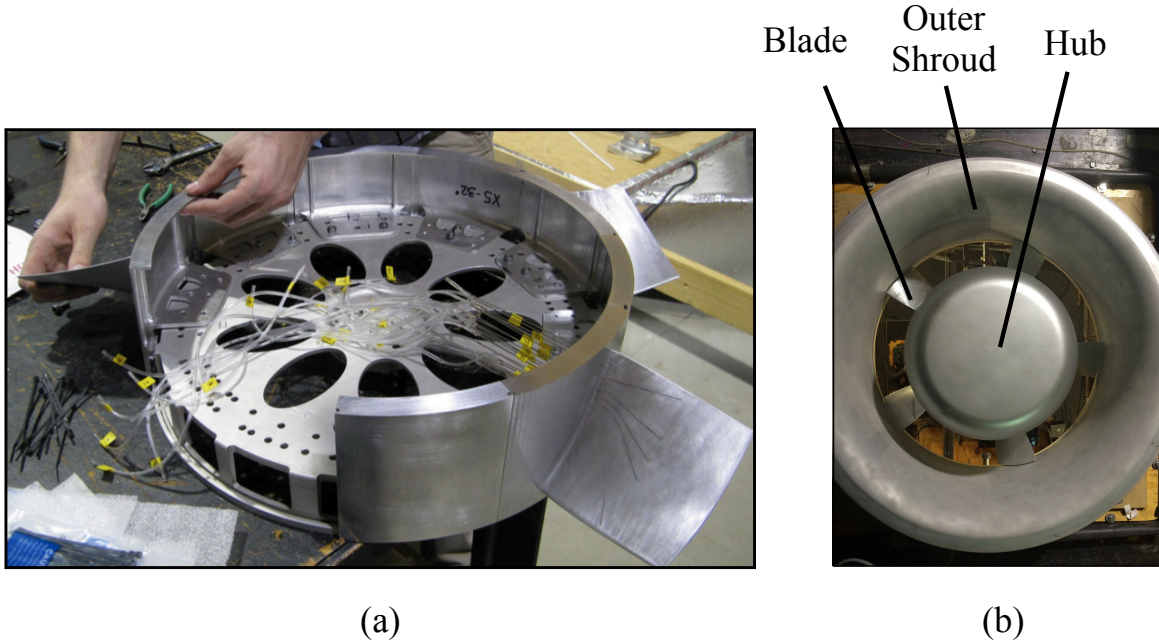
Fan Assembly: (a) five blade fan mid-assembly [Neal (2010)], (b) five blade fan mounted and shroud
